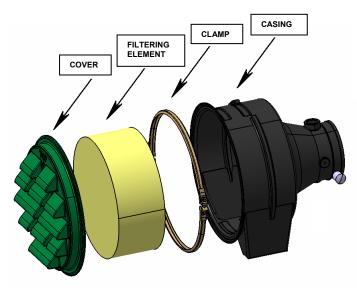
Exploded view of Kohler High Flow one-cartridge air filter
